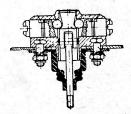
Rear brake shoe expander unit (9 h.p. and 4A).
